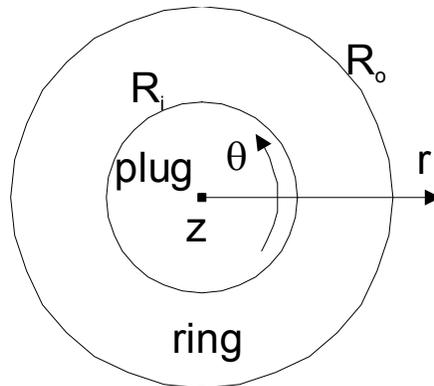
Ring and plug assembly sketch. Z axis is out of the page.
